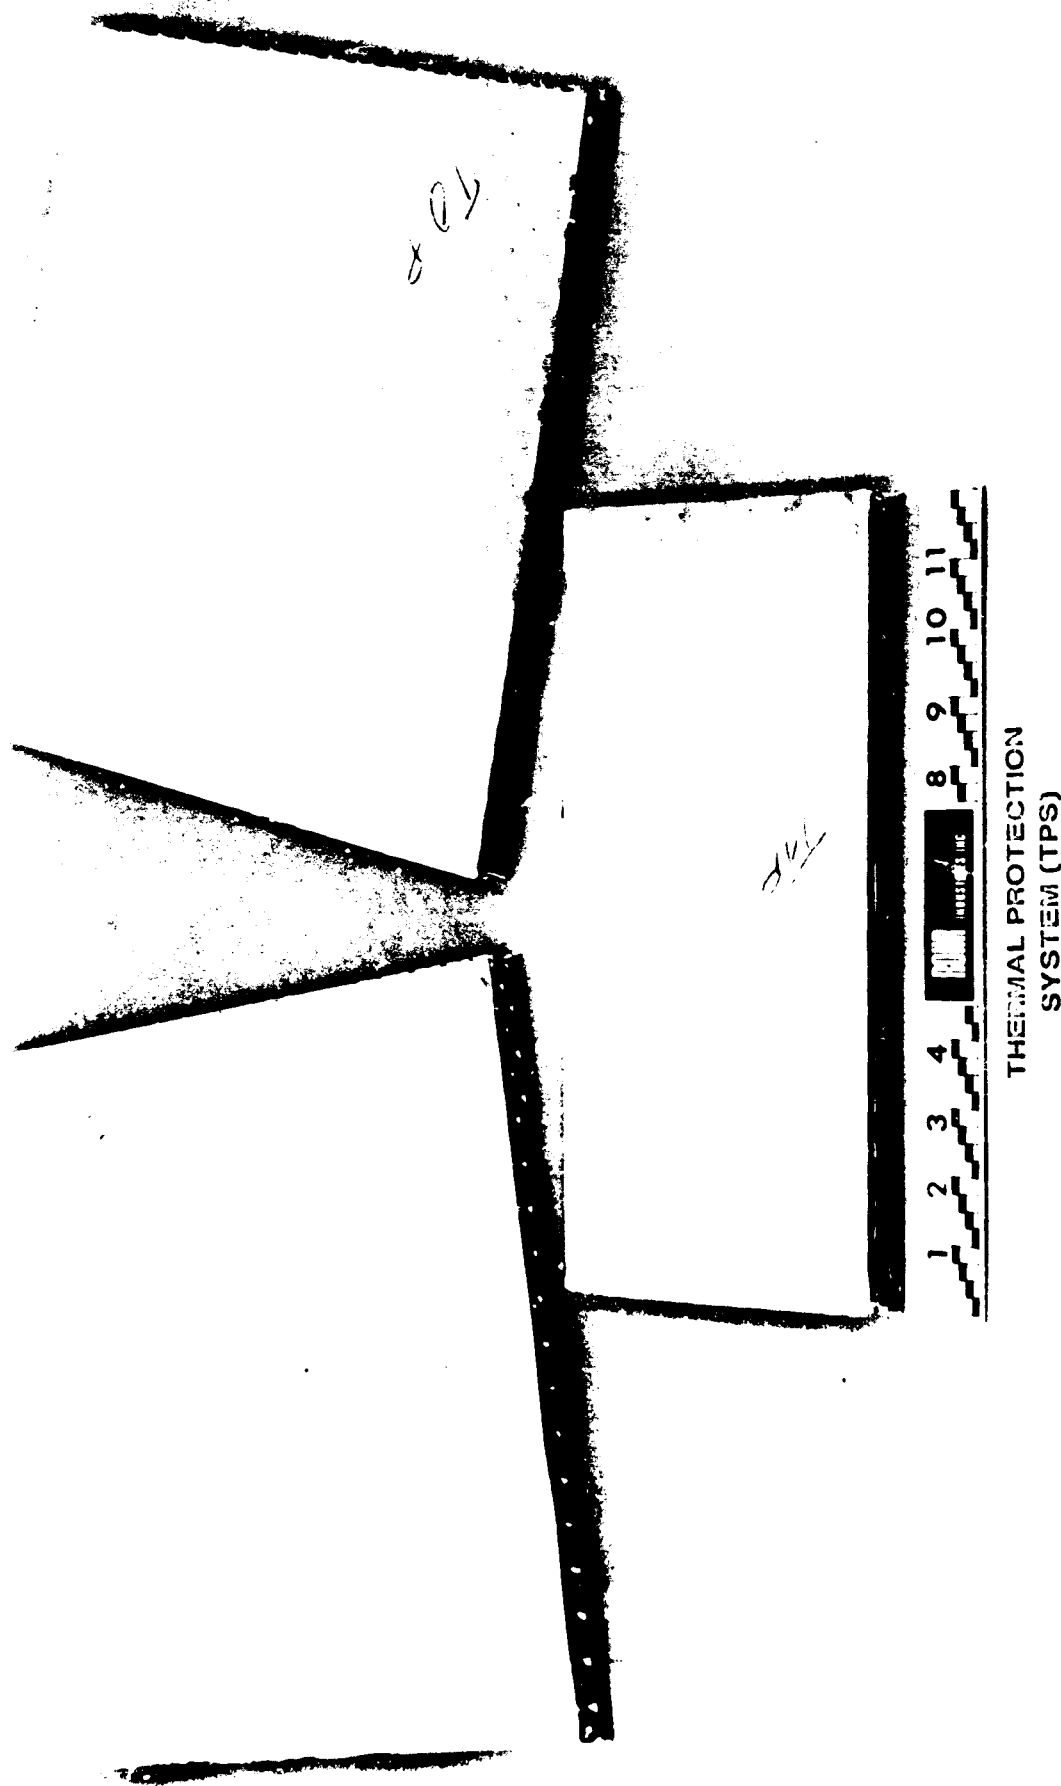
Multiwall Panels LID Bonded for Test Specimens
